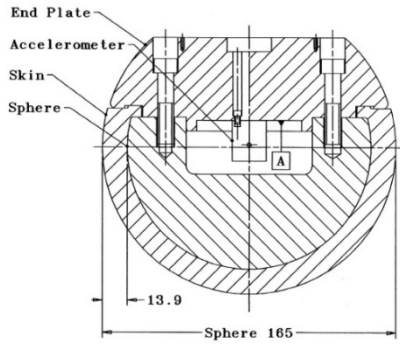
FE Adult pedestrian headform model parts and dimensions [2].
